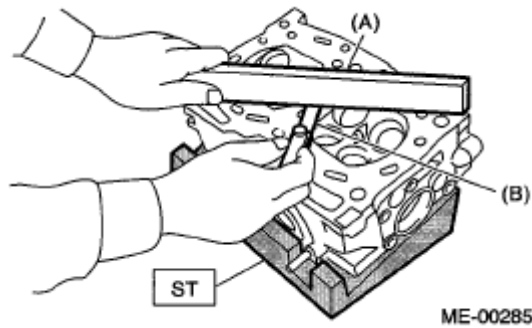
Measuring Warping Of Cylinder Head Surface That Mates With Cylinder Block Using Straight Edge And Thickness Gauge
